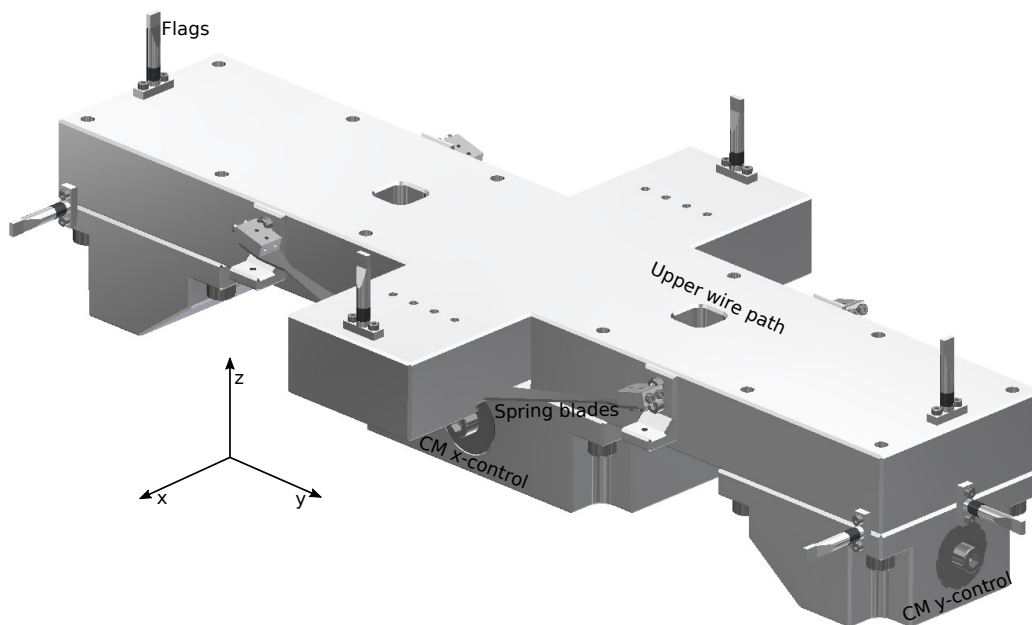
First stage design for the OMC suspension. Showing shape, location of flags for optical sensors and coil actuators, spring blade and wire positions, as well as threaded push rods for CM alignment.
